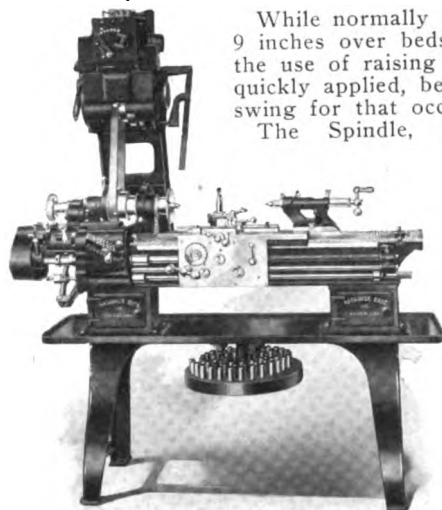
Cataract Quick Change Swing Precision Lathe with Motor Drive
